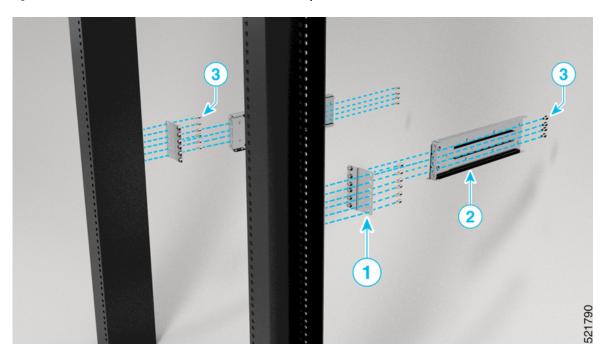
Cisco ASR 9902: Attach Slide Rail Assemblies on 23 inch 2-post Rack
